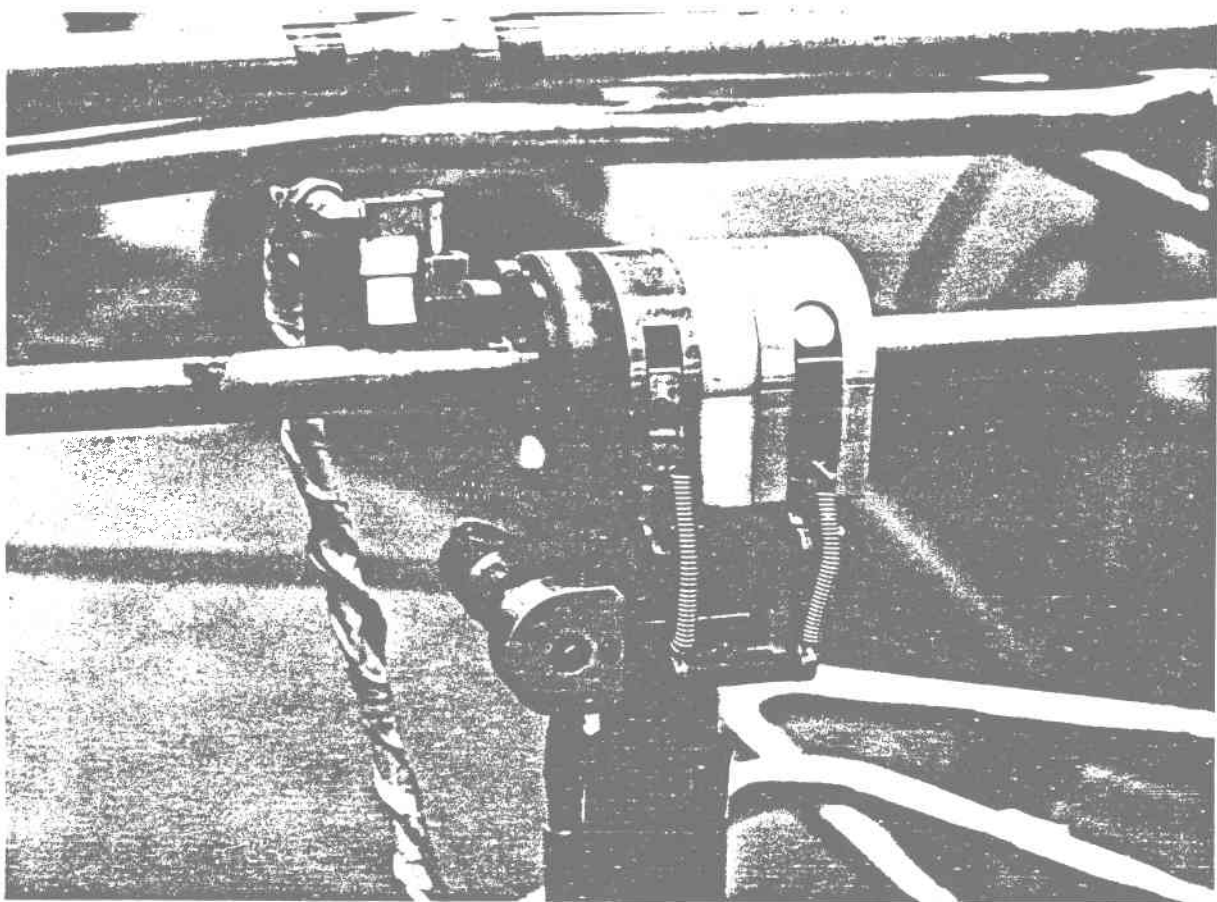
Automatic Welding Torch for Butt-Welding Thin-Walled Tubes
